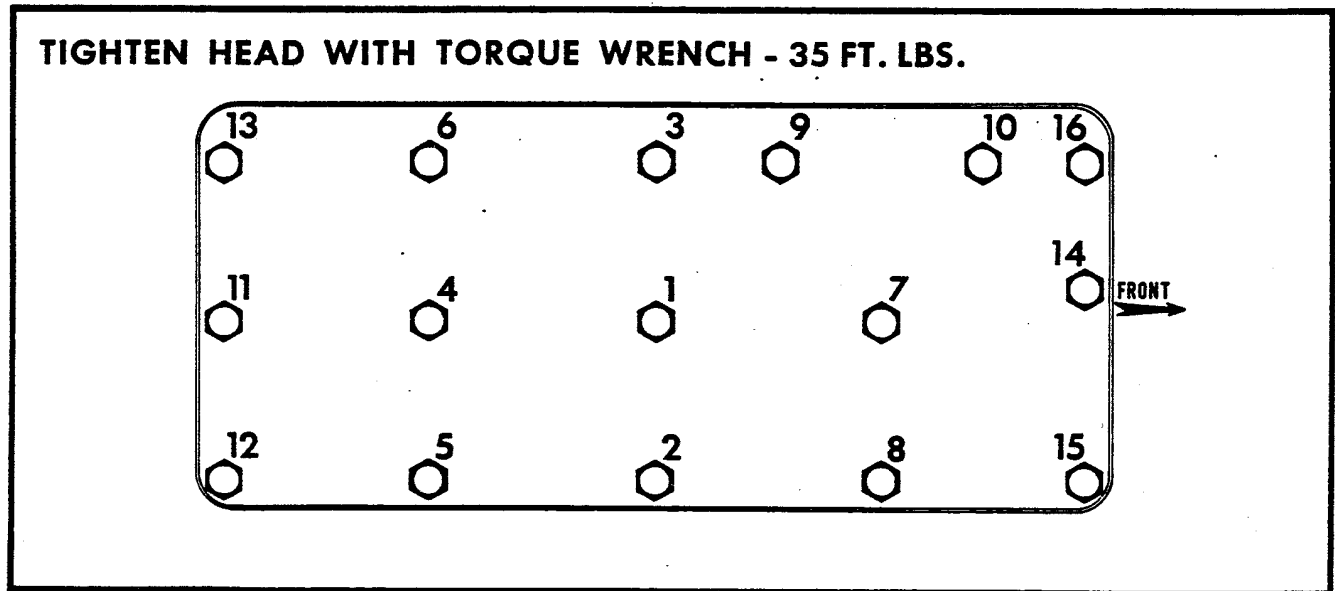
CYLINDER HEAD BOLT TIGHTENING SEQUENCE
